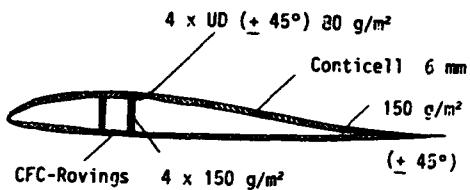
TYPICAL WING SECTION FOR MODERN SAILPLANES
